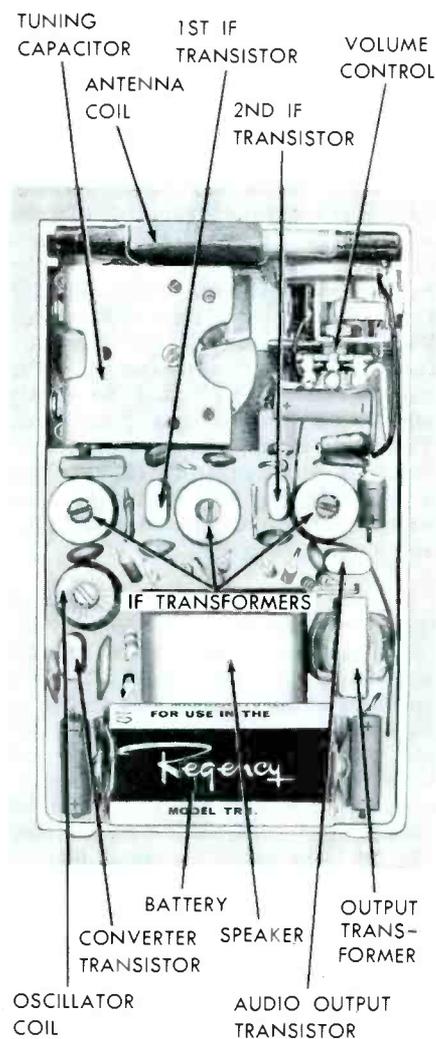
Rear View of Regency Model TR-1 Showing Layout of Components.
